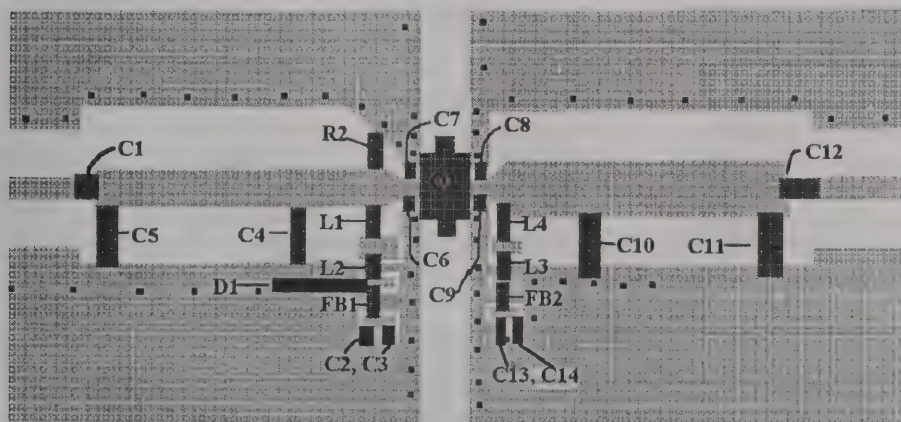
Parts placement for the MRF-873 amplifier. Note the plate through holes. The edges of the board should be wrapped with foil and soldered.
